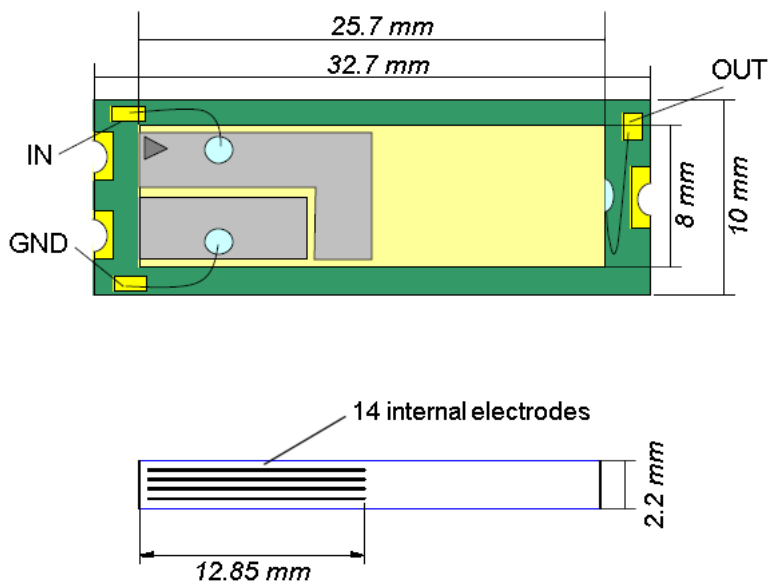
Dimensions of the Transoner Rosen type PT
